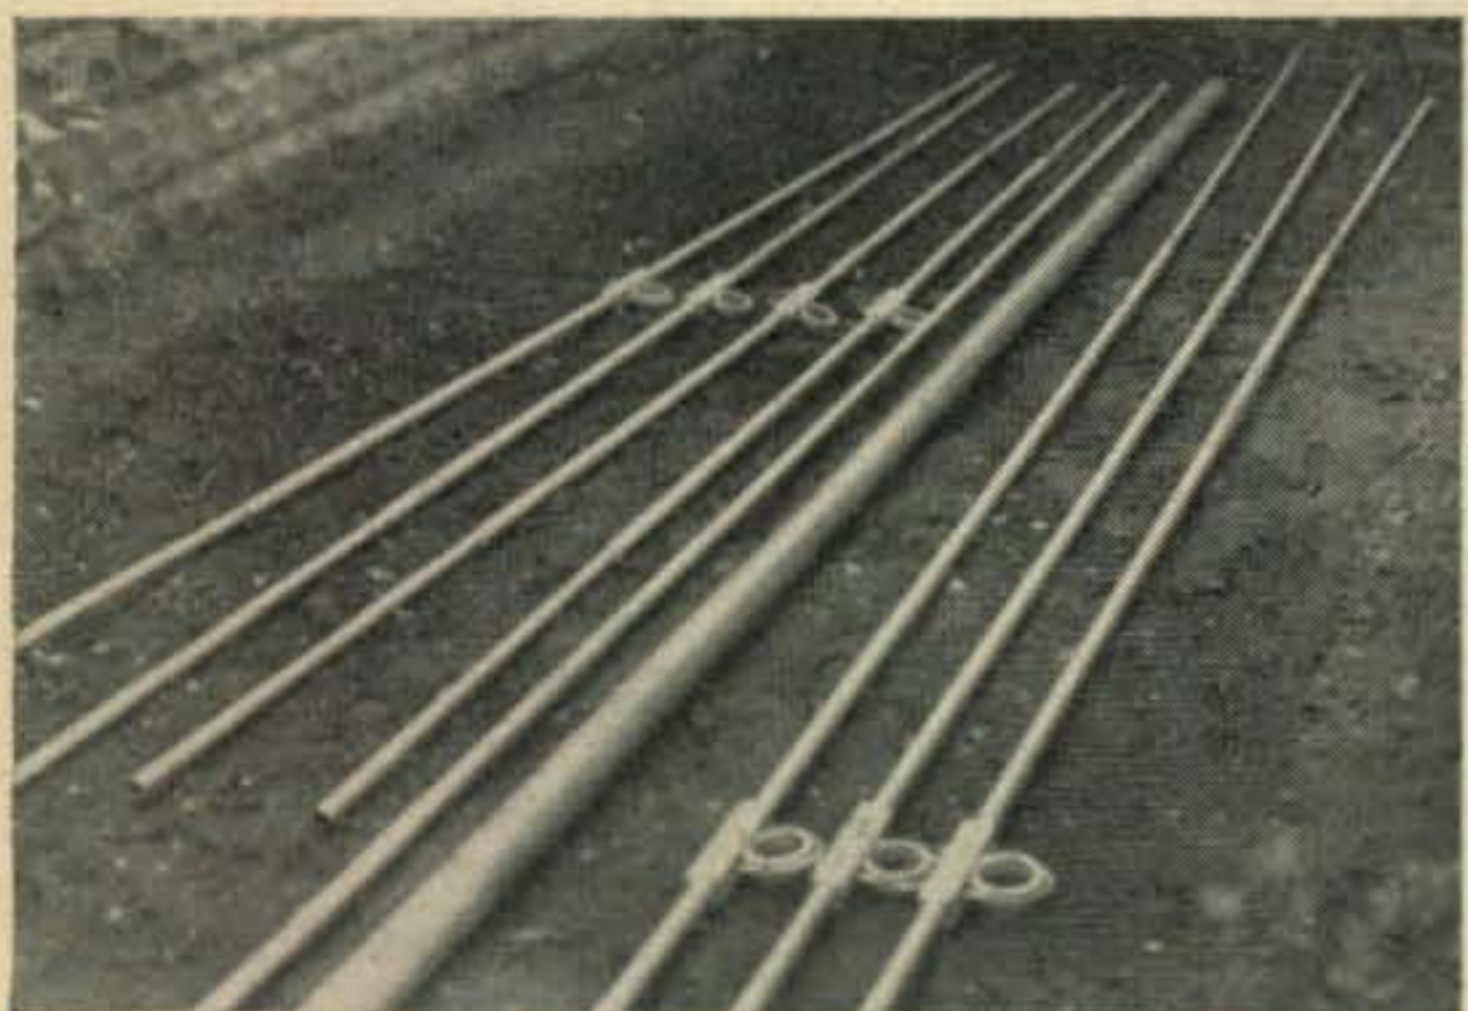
Elements and clamps are assembled and ready for mounting on the boom.
